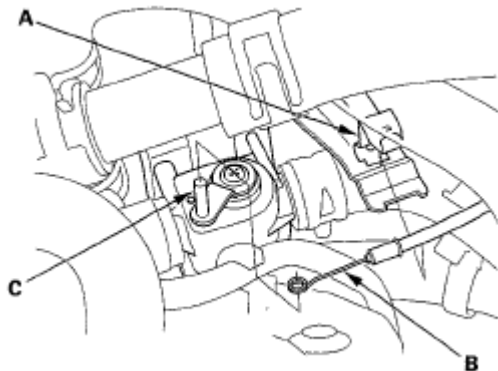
Identifying Cable Clamp, Heater Valve Cable And Heater Valve Arm
